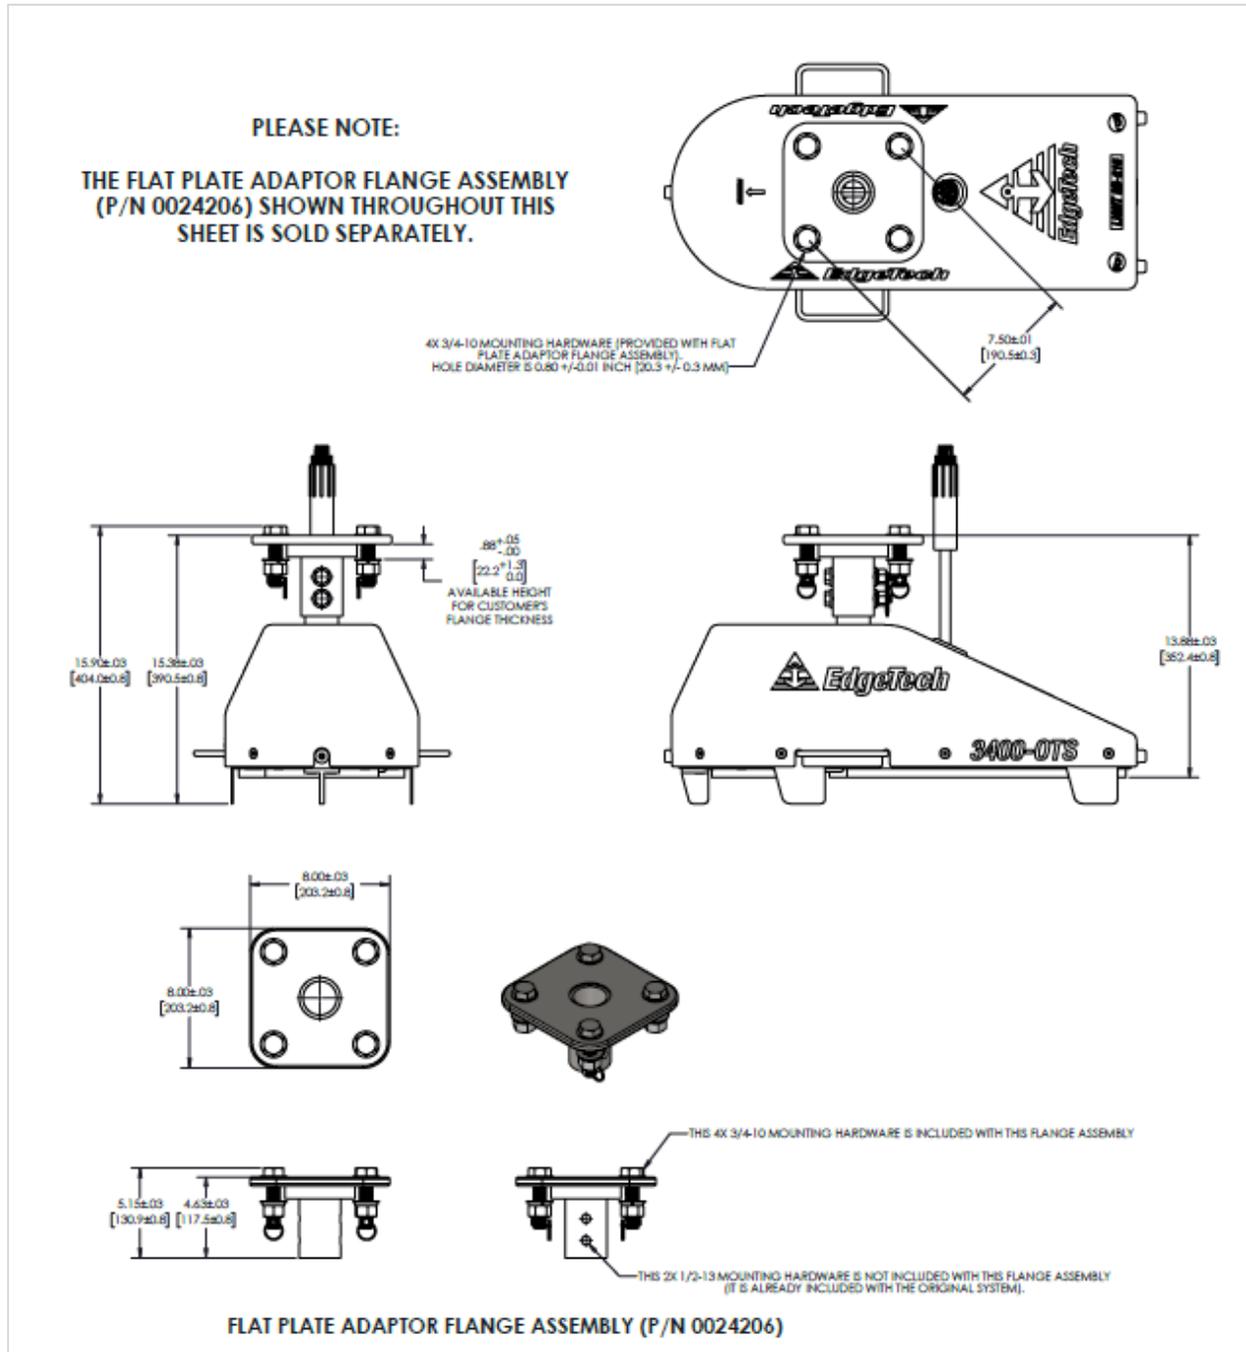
3400 OTS Light and Ultra-Light Flat Plate Pole Mount Adaptor Flange
